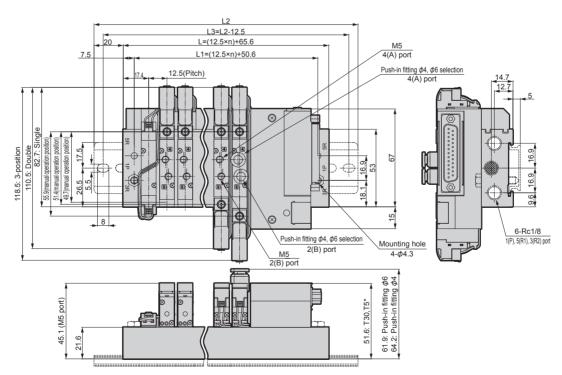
Refer to page 30 for detailed dimensions of the wiring block.
